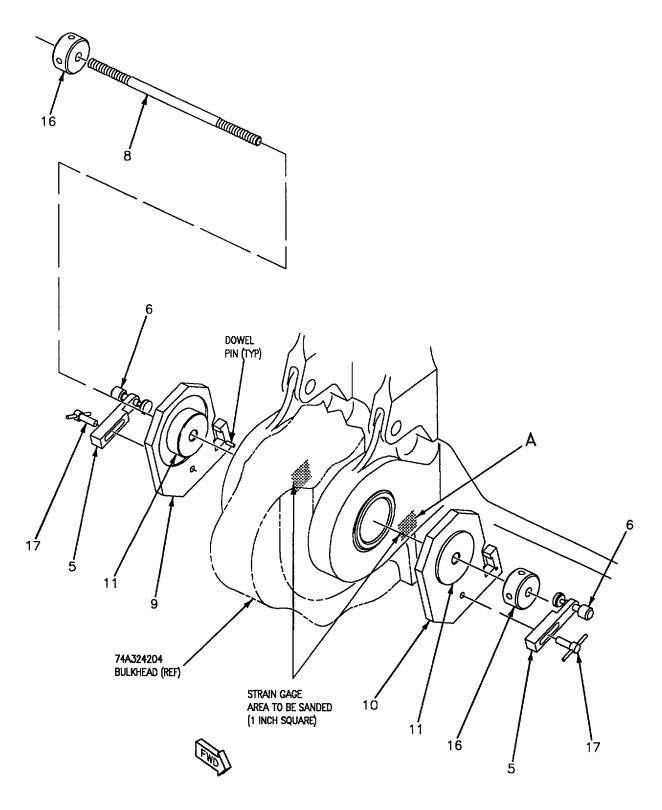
E92111 Strain Gage Bonding Fixture (Sheet 1)
